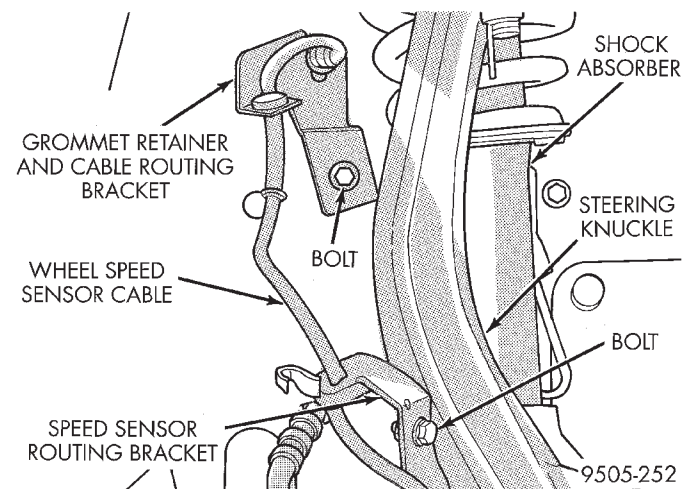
Wheel Speed Sensor Cable Grommet Retainer
